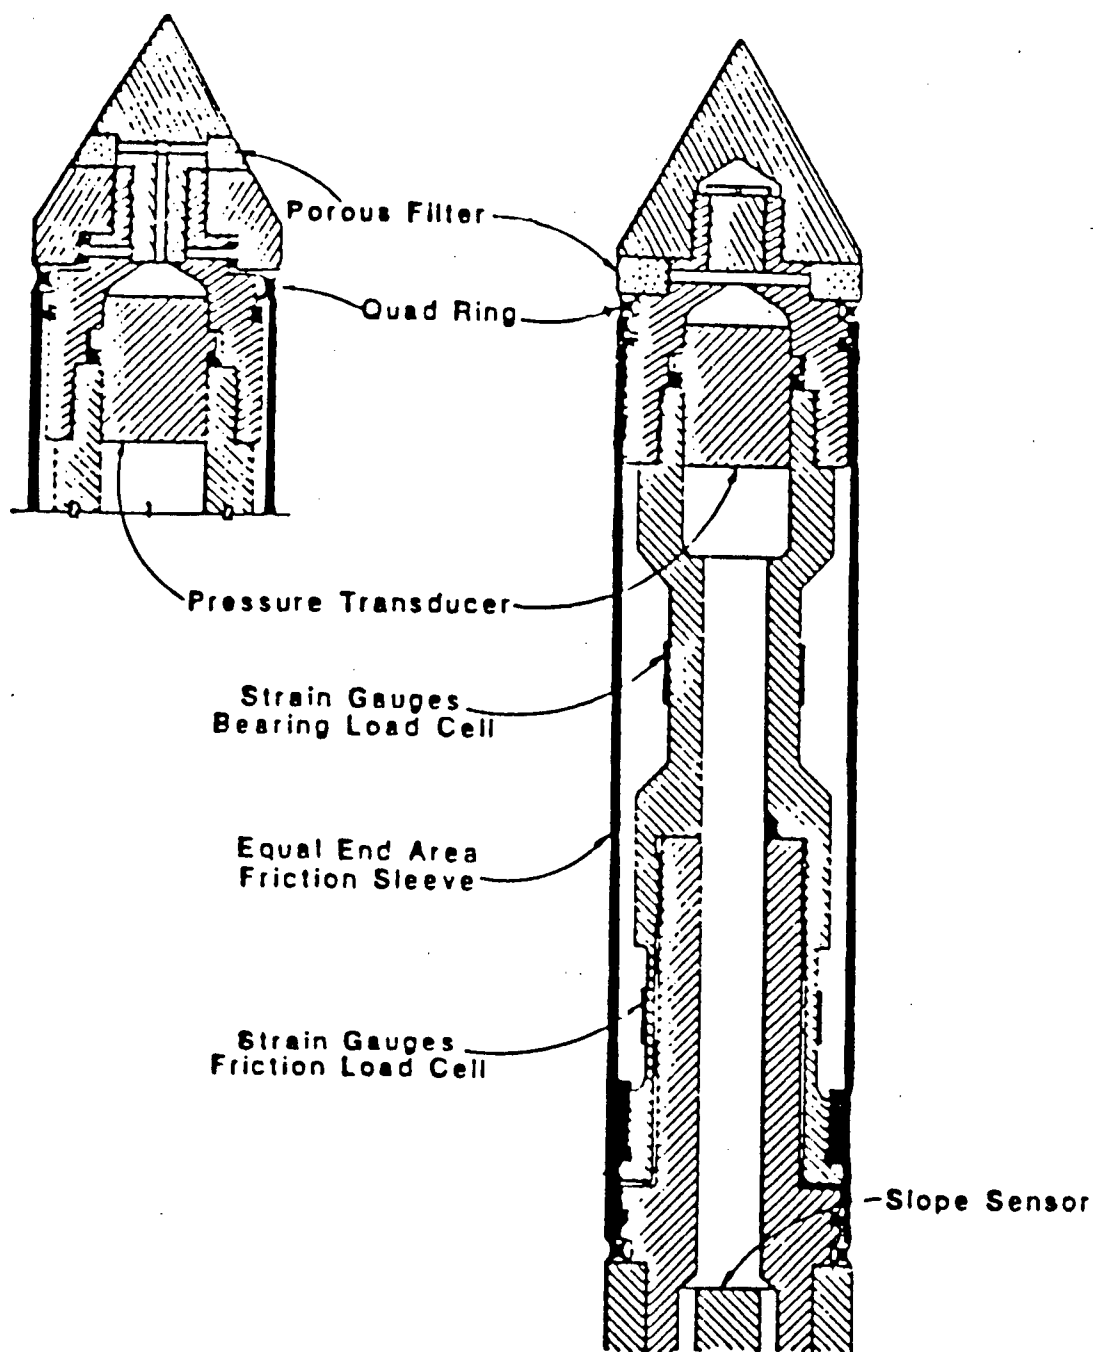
SCHEMATIC OF ELECTRIC CONE DEVELOPED AT UBC
